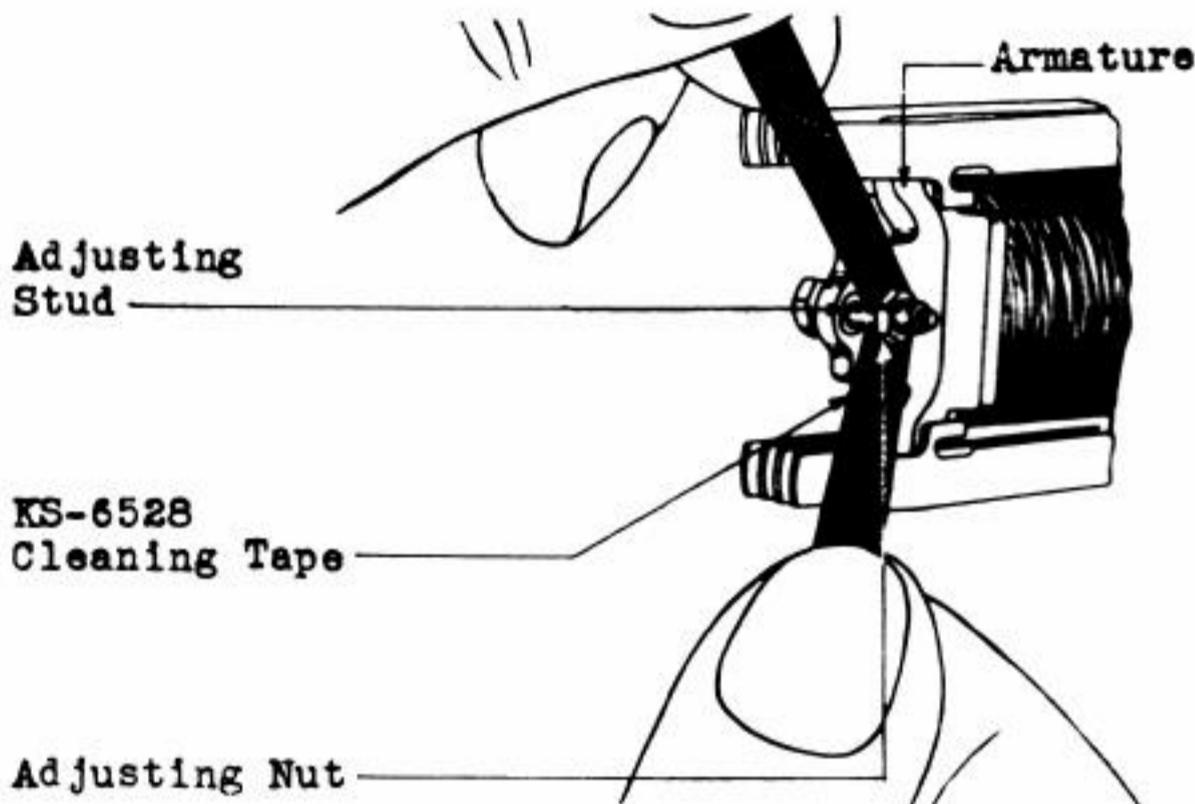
Method of Cleaning Adjusting Nut and Stud on A, E, F, H, R, T and AB Type Relays
